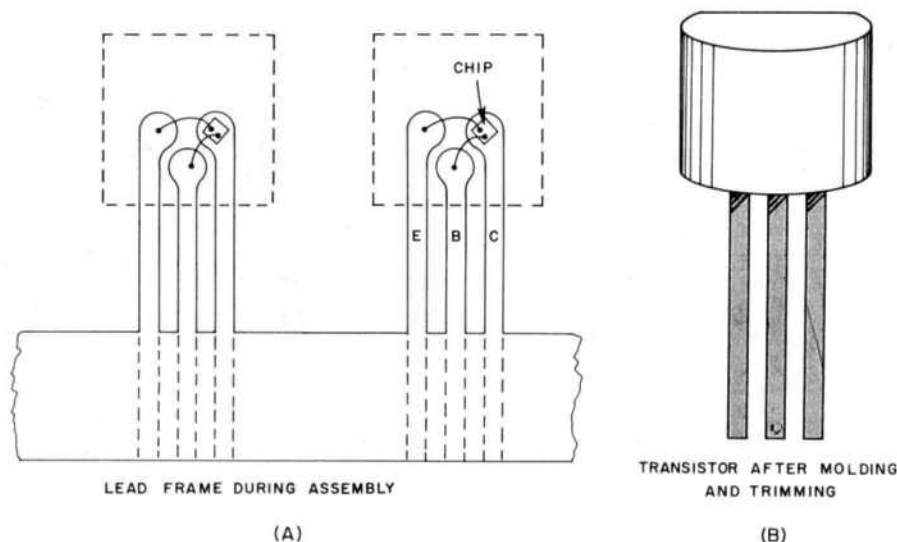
TO-92 automated assembly. Lead frames are stamped out of copper sheet and tin plated. Molded plastic holds everything together after assembly.
